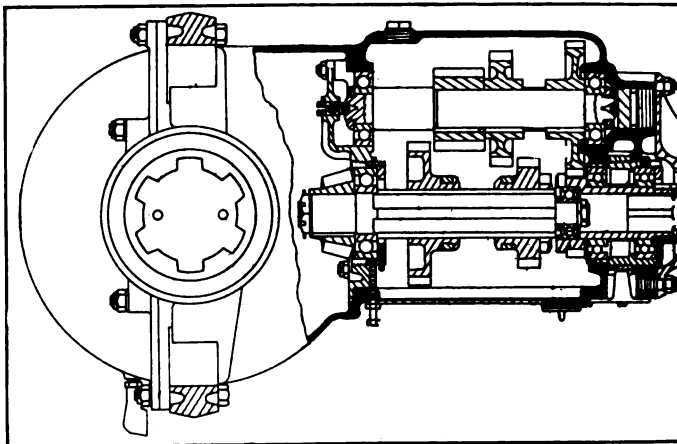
Sectional view of rear unit of Stearns car, in which the drive is taken directly from the gearbox to the differential
